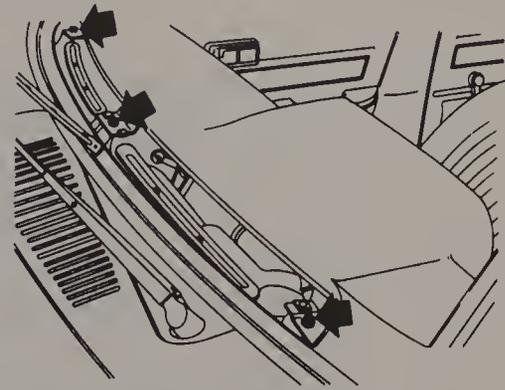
Remove the bolts from the top of the instrument panel (Sec 31)
